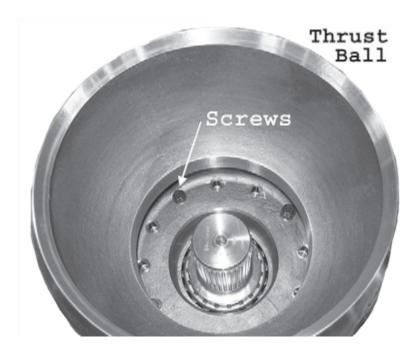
Rotate Thrust Tube Assembly so Ball is Up, Remove 12-point Capscrews
